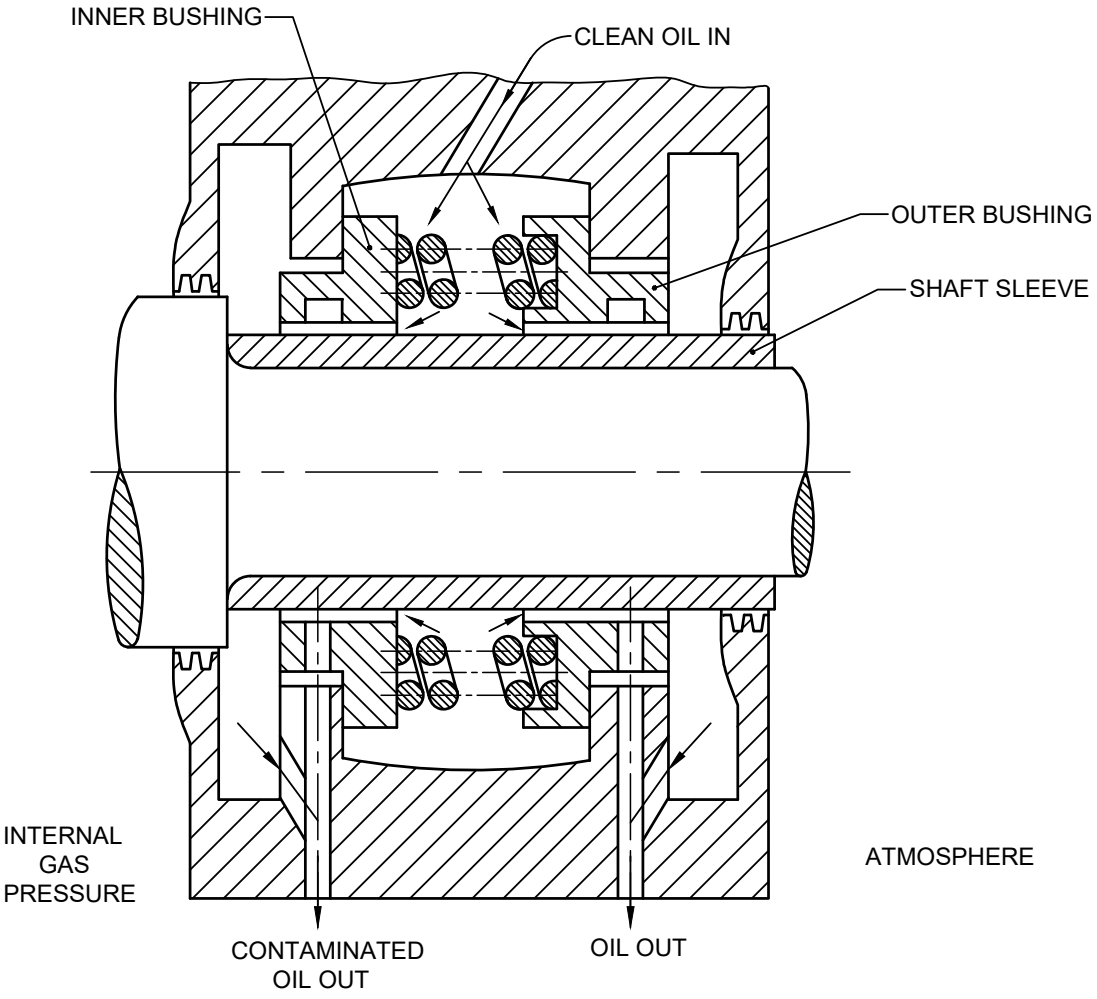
LIQUID-FILM SHAFT SEAL WITH CYLINDRICAL BUSHING
